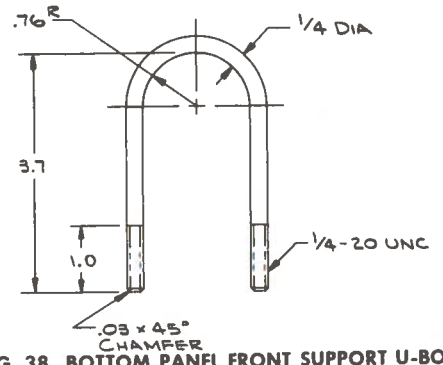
BOTTOM PANEL FRONT SUPPORT U-BOLT
